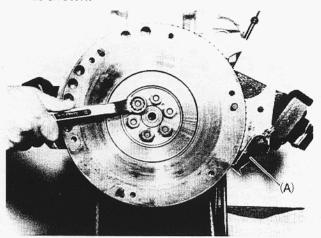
(A) Flywheel holder (Special tool 09924-17810)
